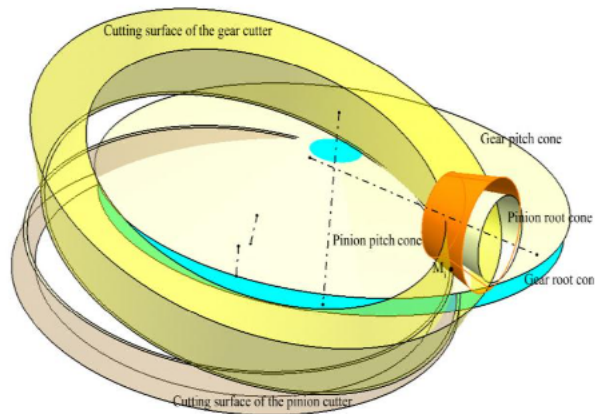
Local synthesis between gear cutting surface, gear, pinion and pinion cutting surface
